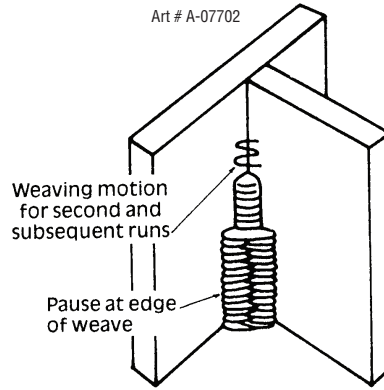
Multi Run Vertical Fillet Weld
